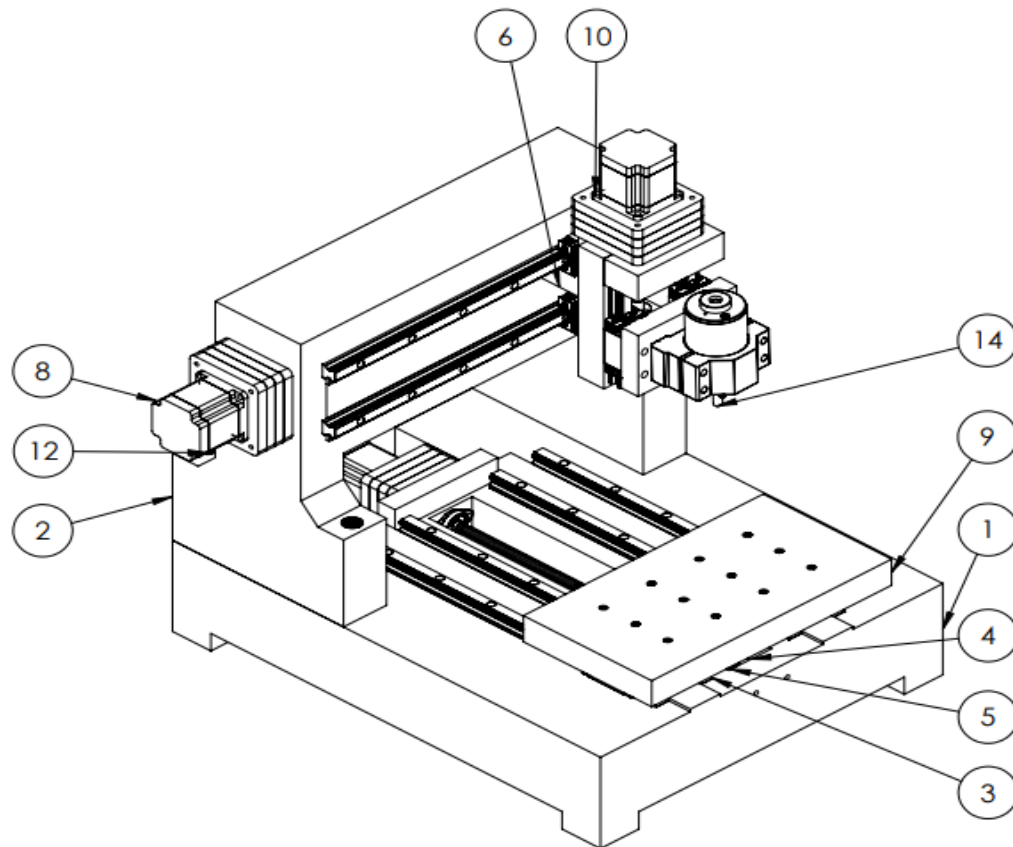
Assembly drawing of EG micro-milling machine Design-2
